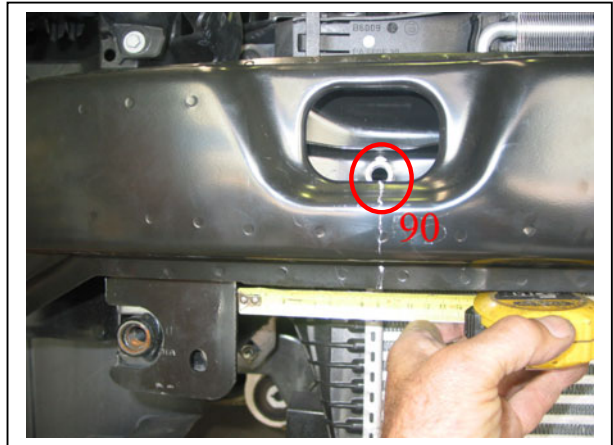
measure to 90mm and project up into opening. Note: hole has been drilled in picture.
